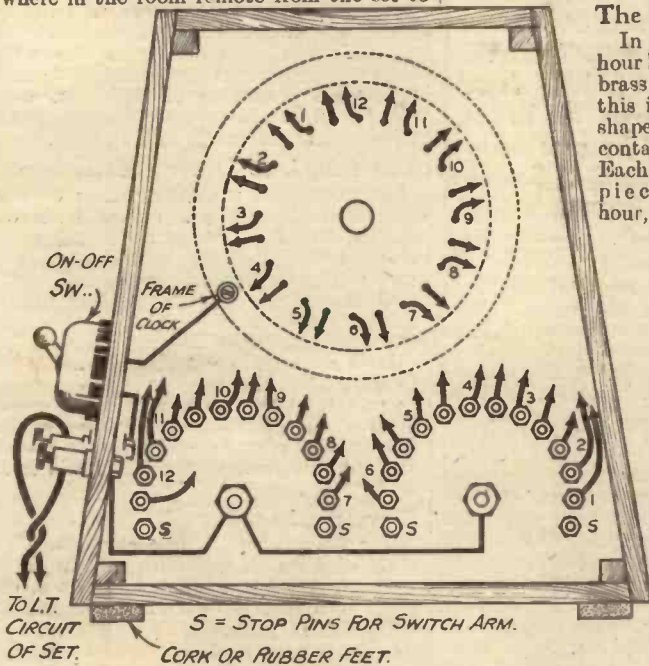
Rear view of the time-switch, with cover removed, showing the wiring connections.
